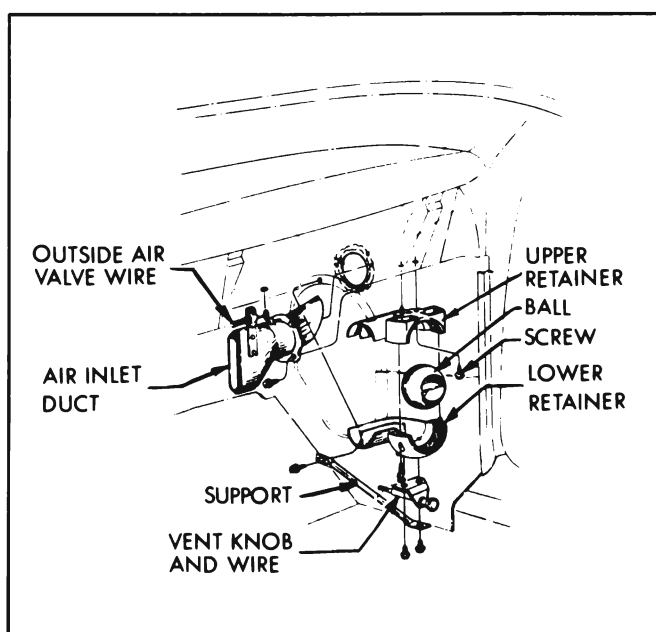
Air Inlet Duct and Right Air Outlet Installation
